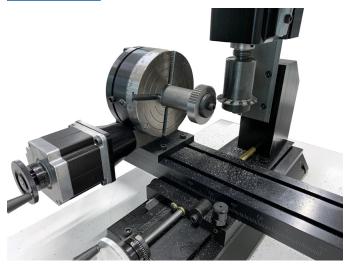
This is a typical gear-cutting setup. The gear is held on the rotary table with a customized, 2" end mill holder (P/N 3082). The gear cutter is an involute cutter and is held in the headstock spindle with a gear-cutter arbor (P/N 3231). This rotary table is driven by a stand-alone CNC controlled rotary indexer.
